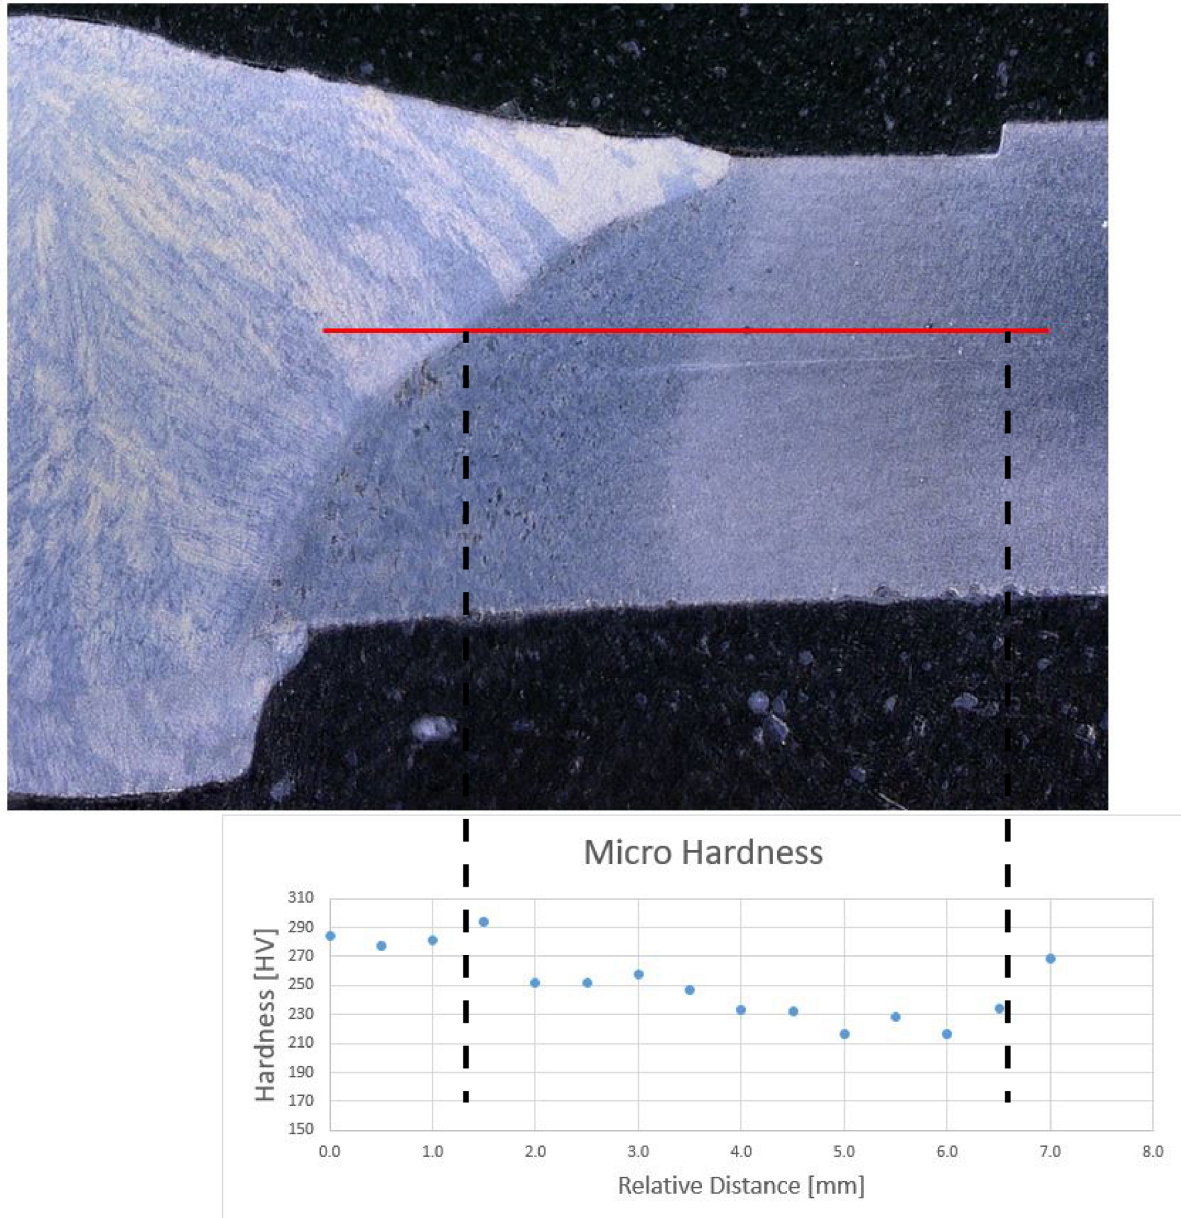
Cross-section repair weld with Hardness measurement points.
